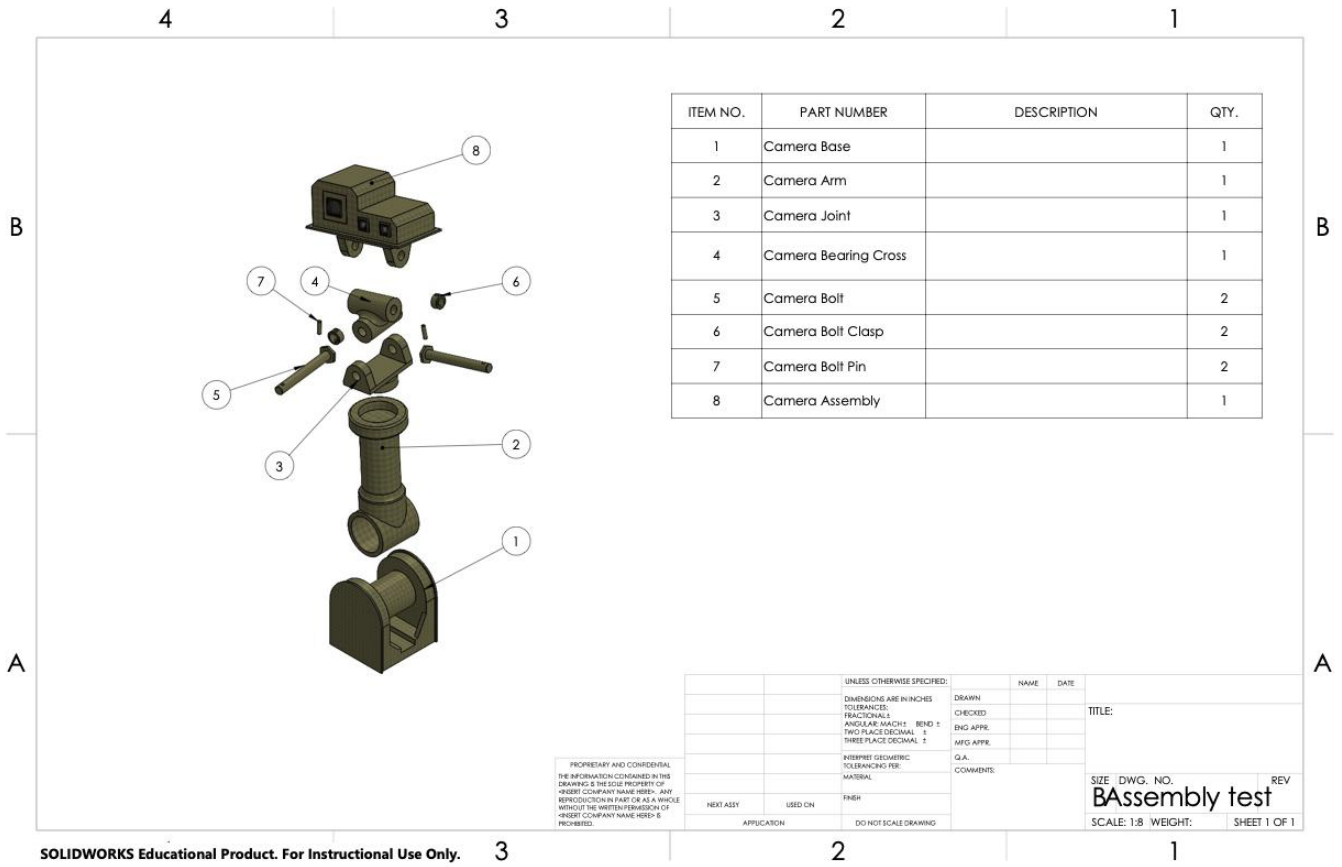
Solidworks CAD 3D model of ARES-42 camera assembly
